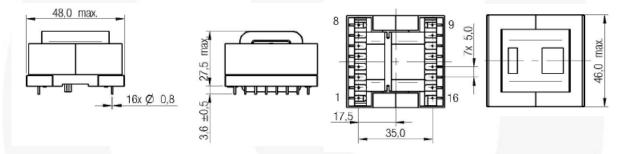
Wurth 760895731 Mechanical Drawing (dimensions in mm)
